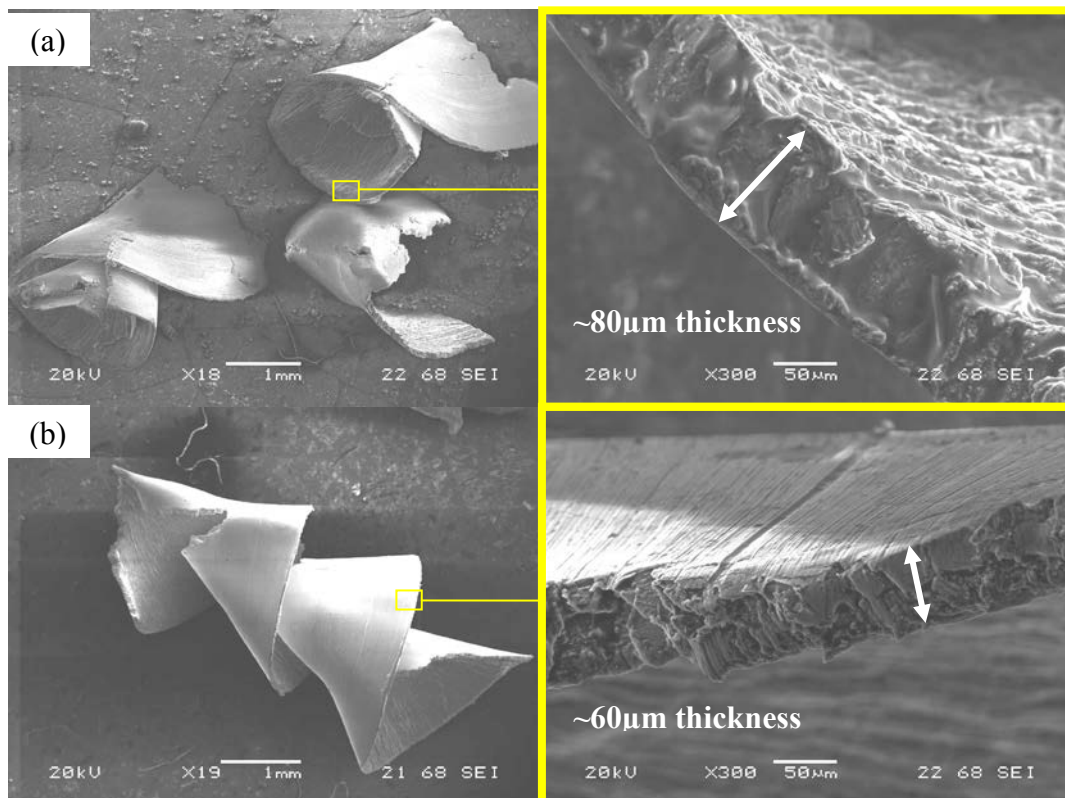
Chip formation produced by CVD diamond coated drills under different cutting speeds in (a) Test 3 (130m/min) and (b) Test 4 (260m/min)
